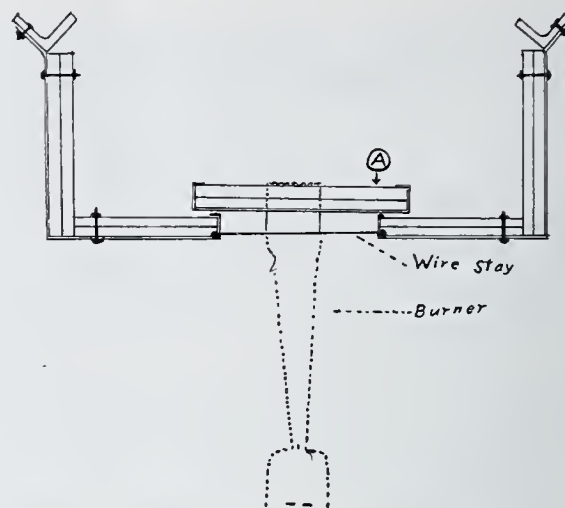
SECTIONAL VIEW OF SIDES AND BOTTOM
